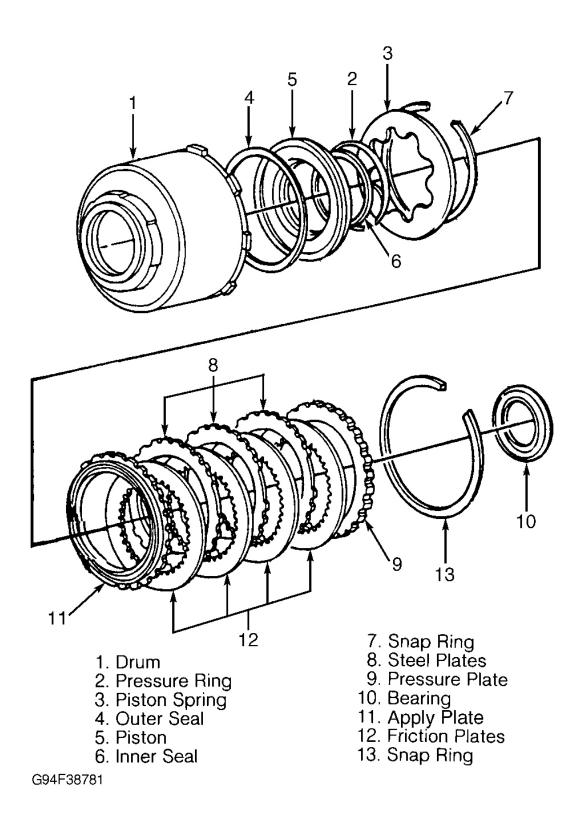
Exploded View Of Reverse Clutch Assembly Courtesy of FORD MOTOR CO.
